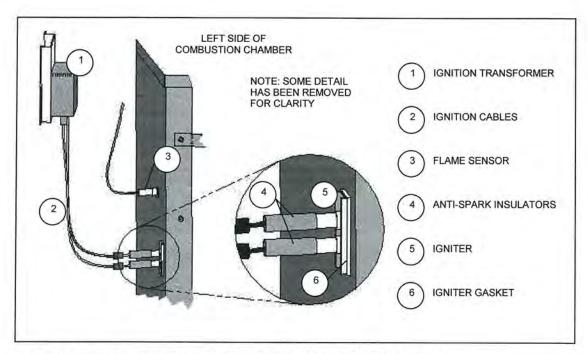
IGNITION TRANSFORMER, IGNITER ASSEMBLY, AND FLAME SENSOR
